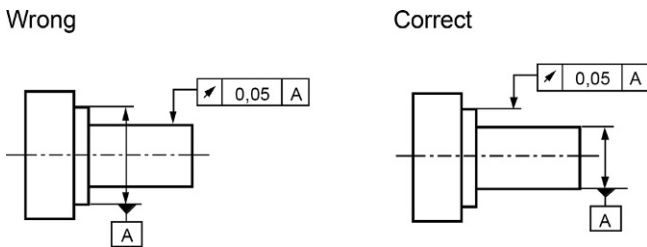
Tolerancing: inspection appropriate (right) and not inspection appropriate (left)
